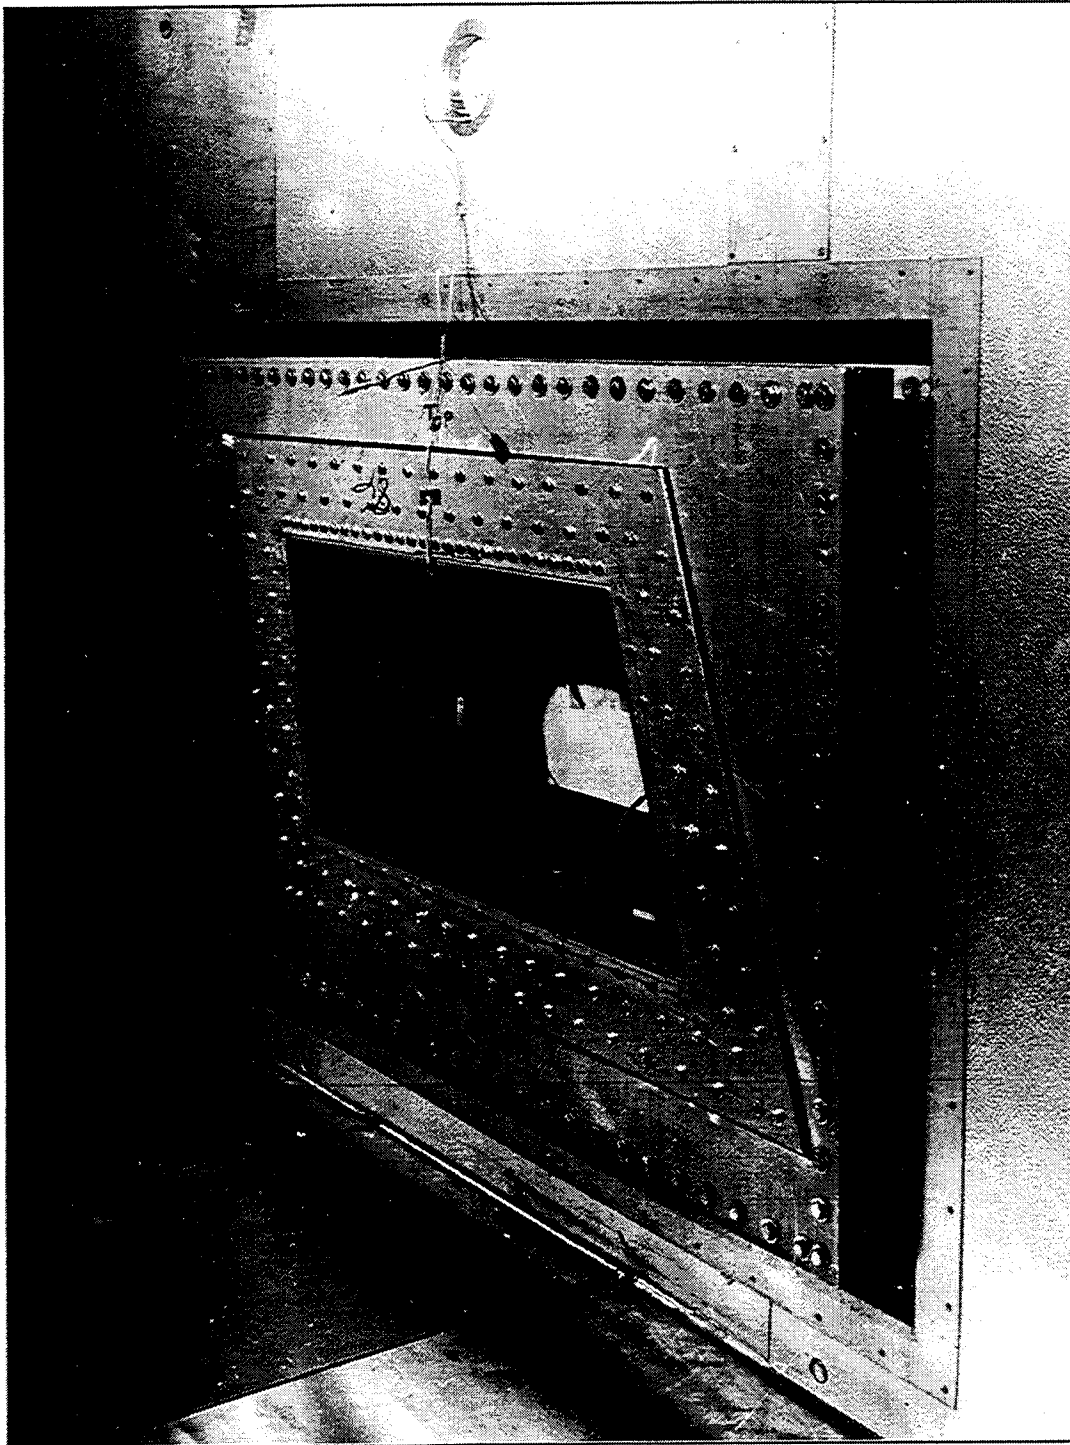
Typical C/KC-135 #1 W/WS Pressure Integrity Test Set Up
